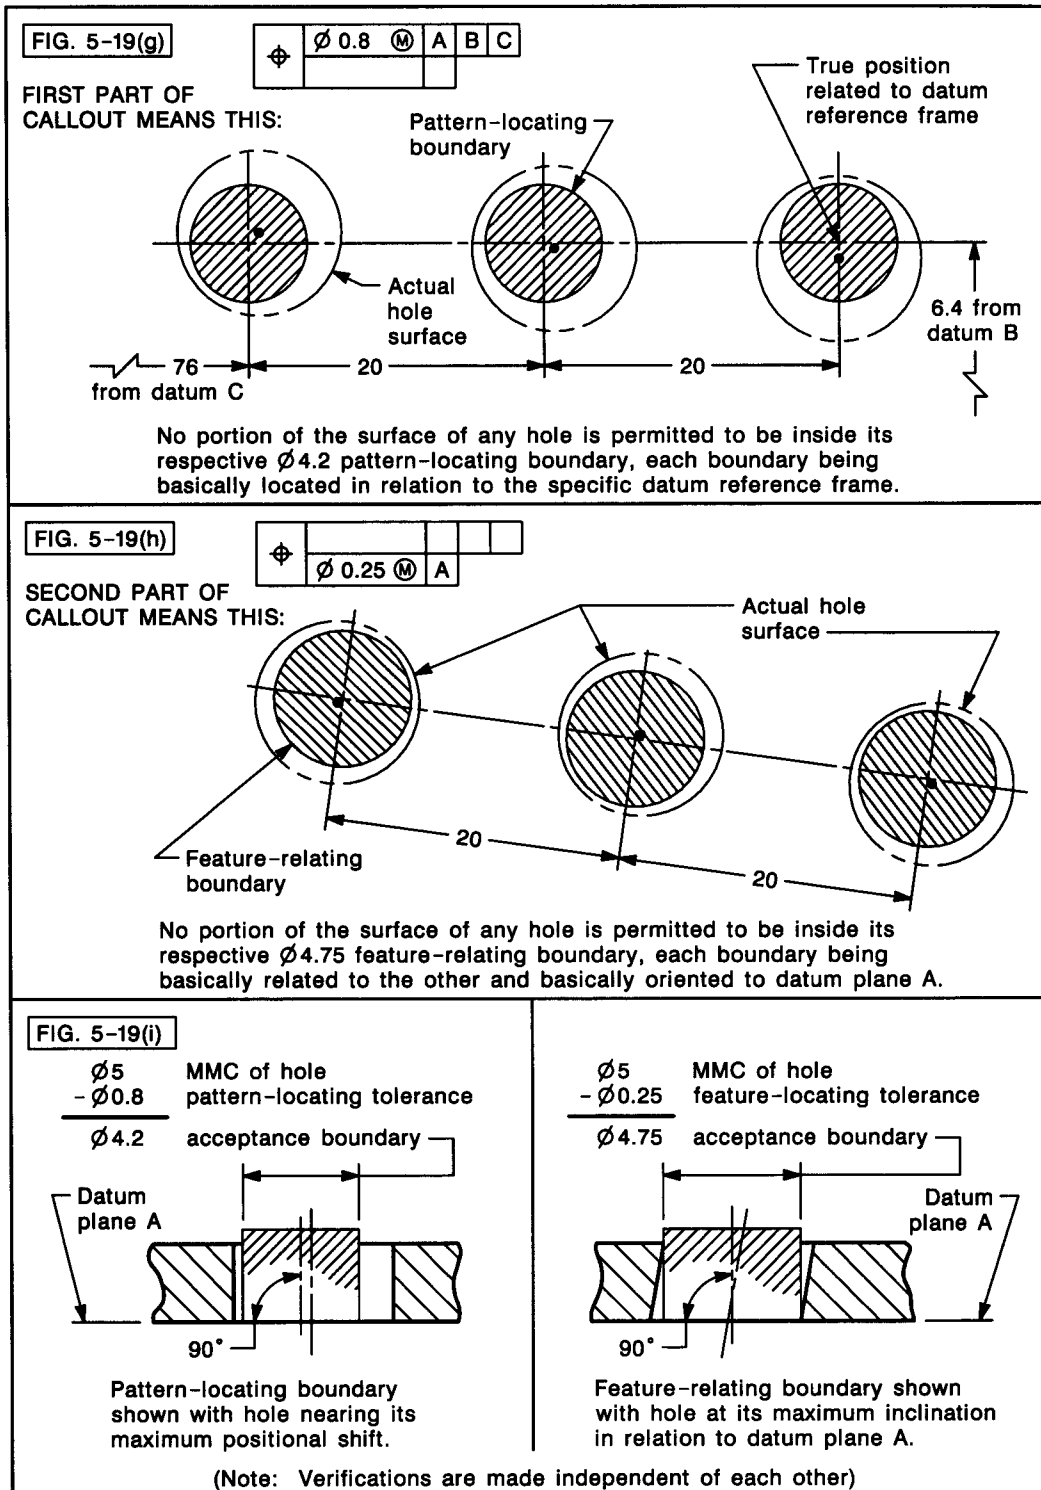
HOLE PATTERNS LOCATED BY COMPOSITE POSITIONAL TOLERANCING (CONT'D)
